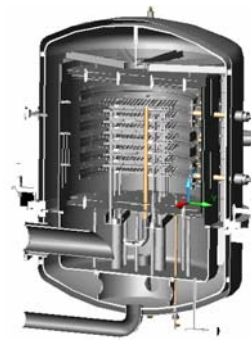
Design of PADS furnace in a 3D cut isometric view
